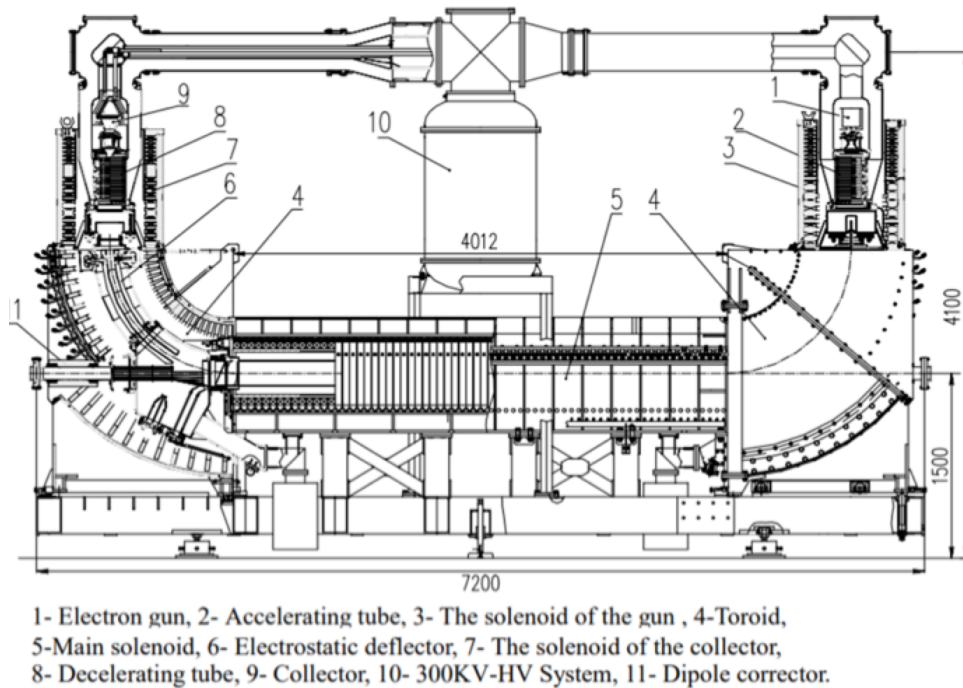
A technical drawing of the CSRe DC cooler at HIRFL-CSR of IMP, China.
